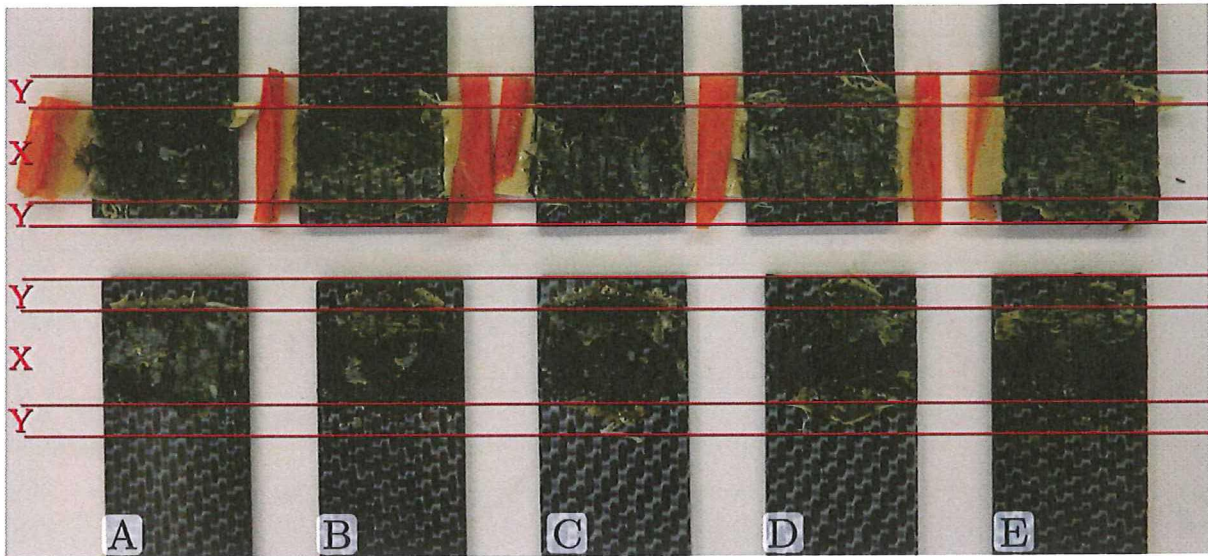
| Fracture surfaces of the dedicated area sized ED welded samples A – E: #101 – #105 (appendix B)
